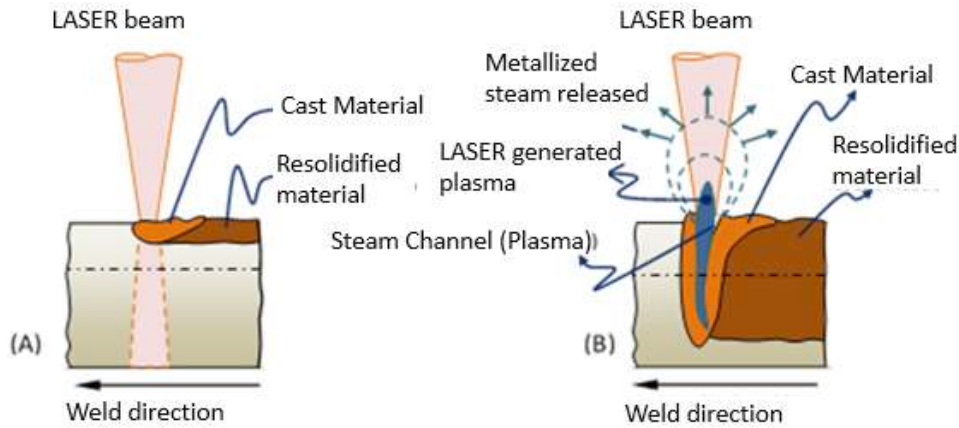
Representation of the conduction welding process (A) and penetration welding (B)
